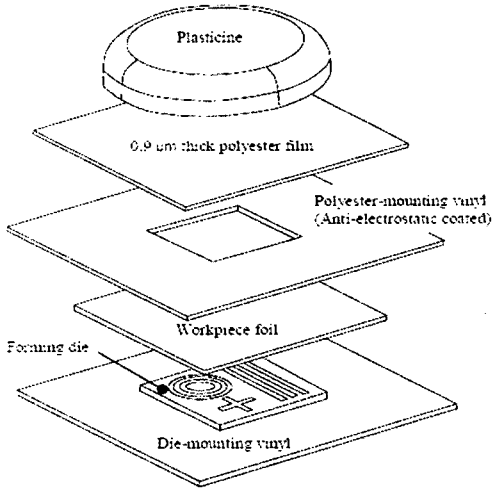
A stack composed of die-workpiece-polyester film-plastine
